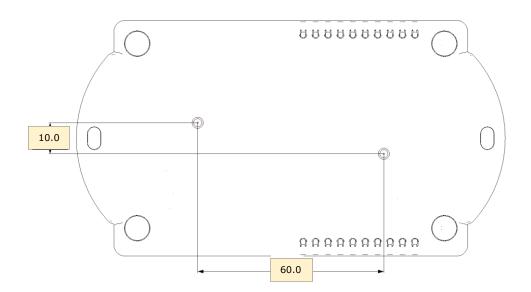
LDSBus Trailing Edge Light Dimmer Dimension - Bottom View
